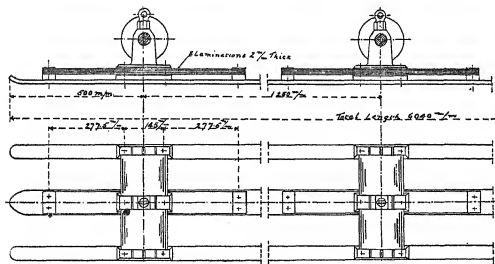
Elevation and plan of skate collector in the Diatto system.
